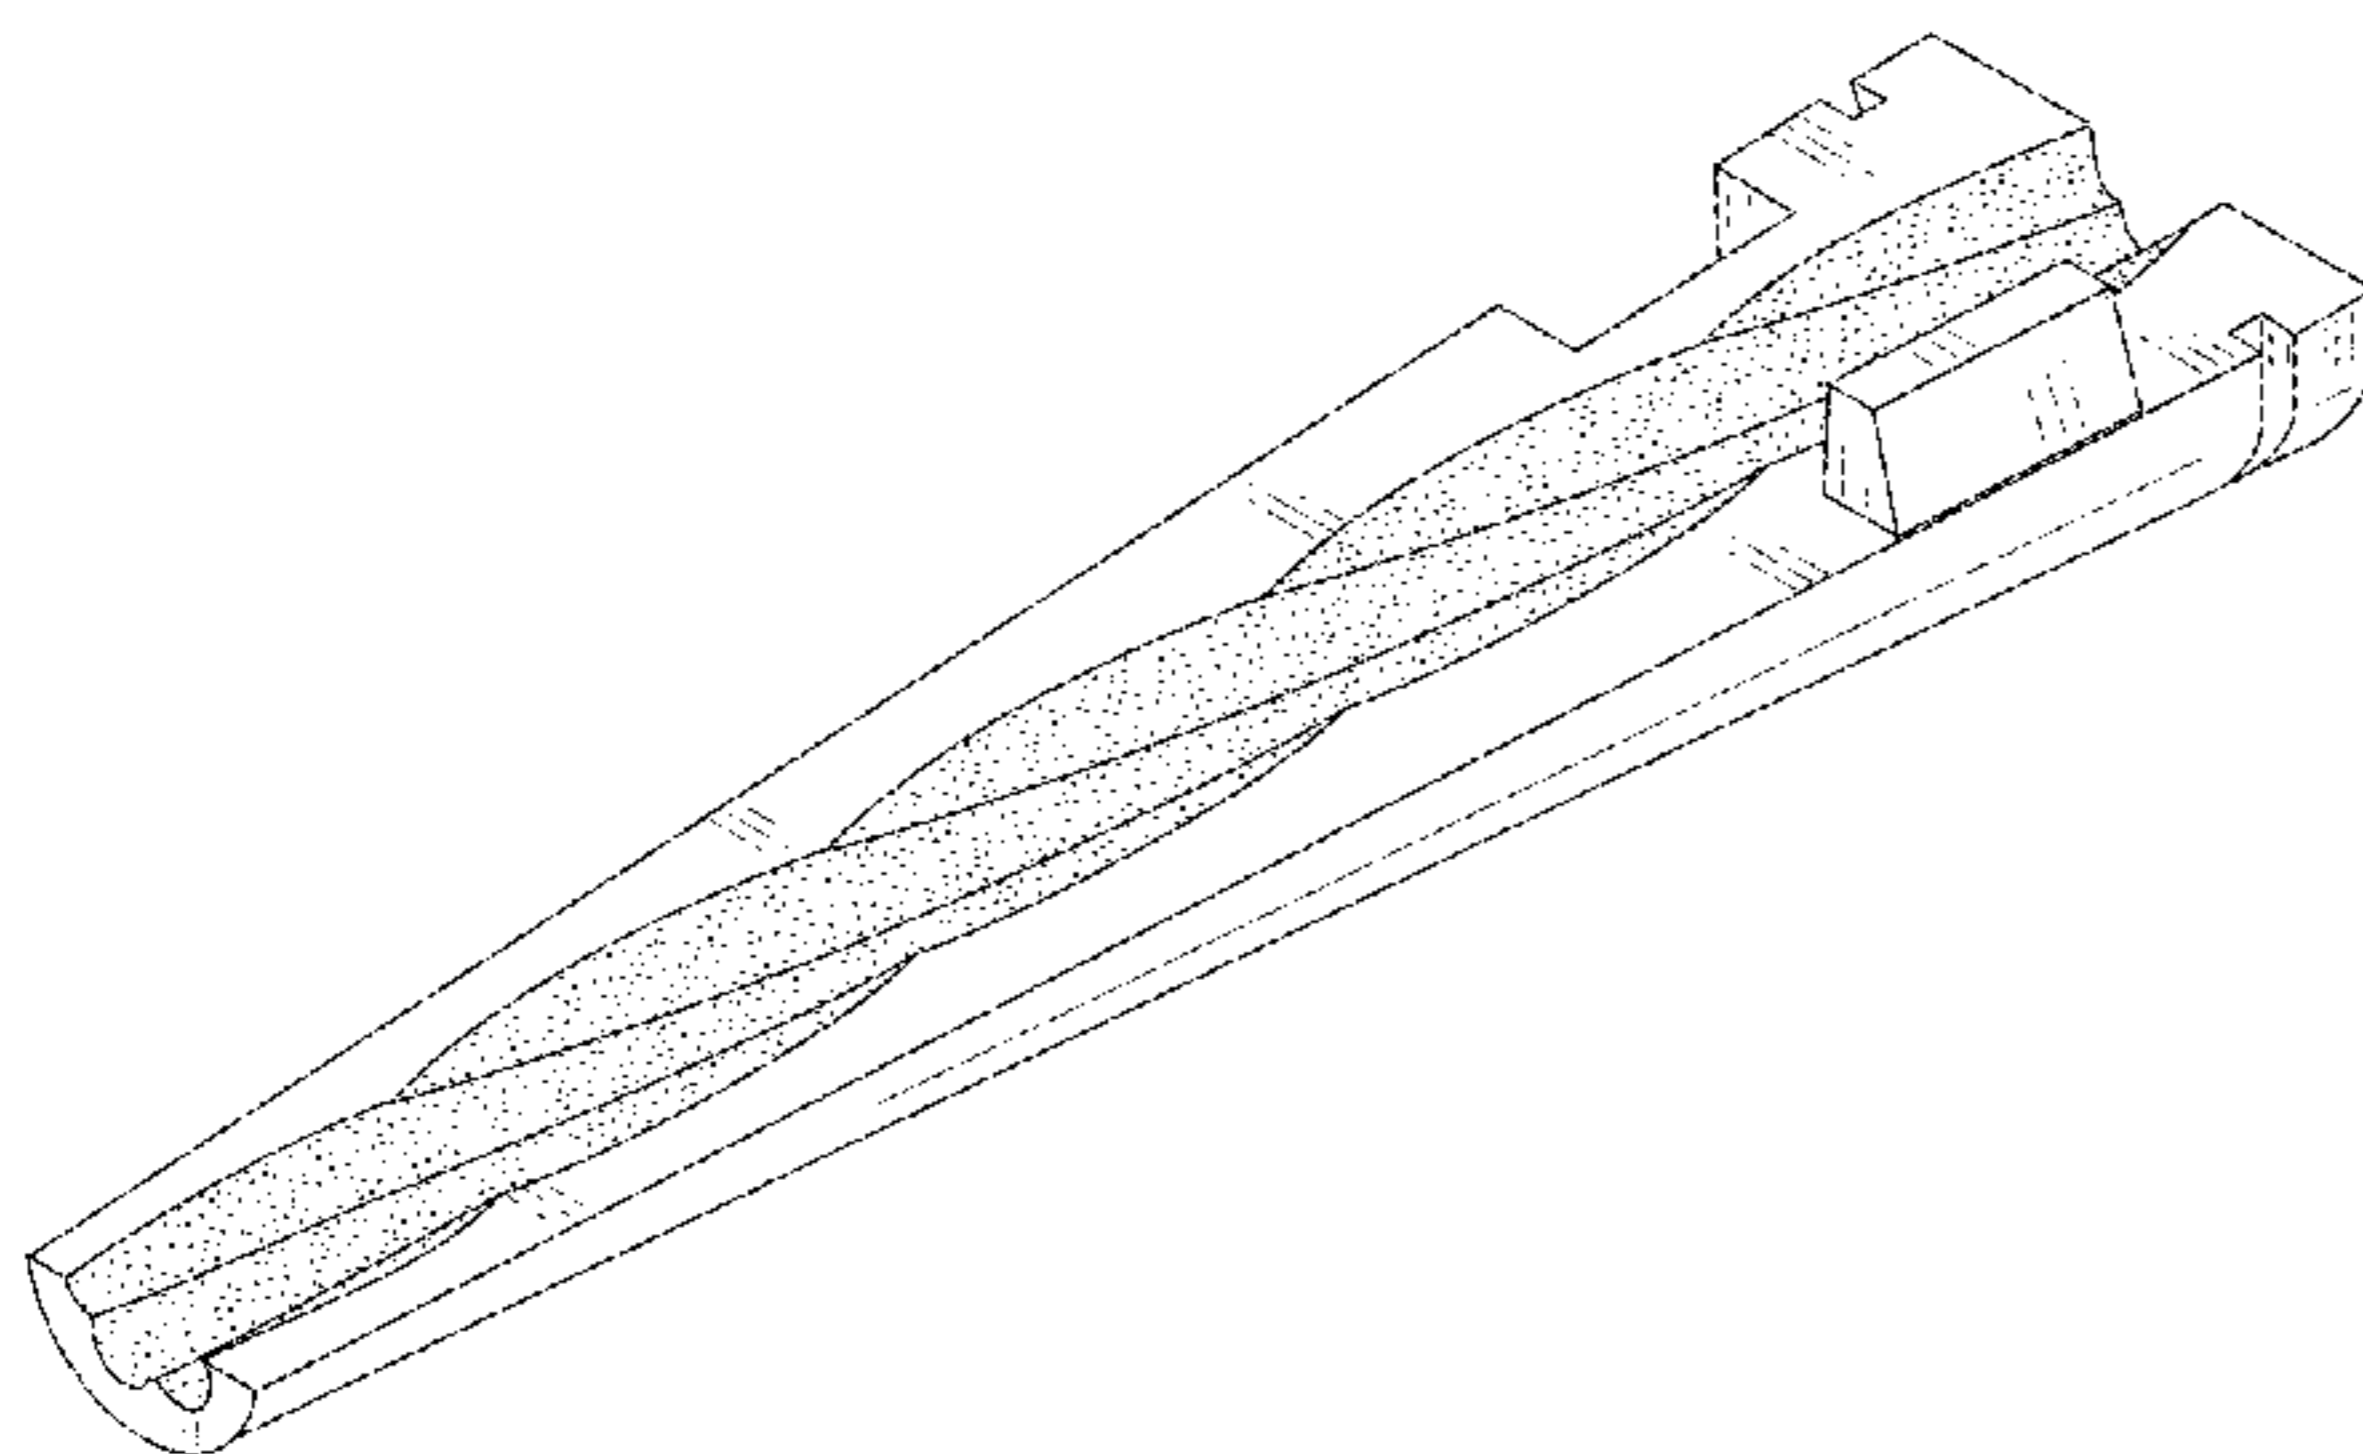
is a front, bottom and left side perspective view of a second embodiment of a tool for fixing a tension member of composite strand for prestressed concrete reinforcement and post tensioning concrete structure, showing our new design;
